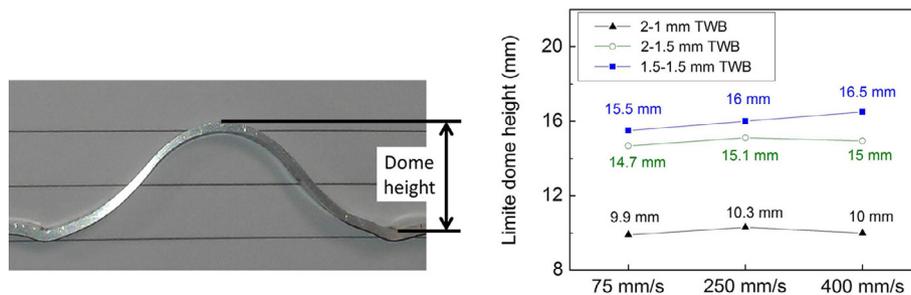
Limit dome height of HFQ[®] formed tailer welded blanks.
